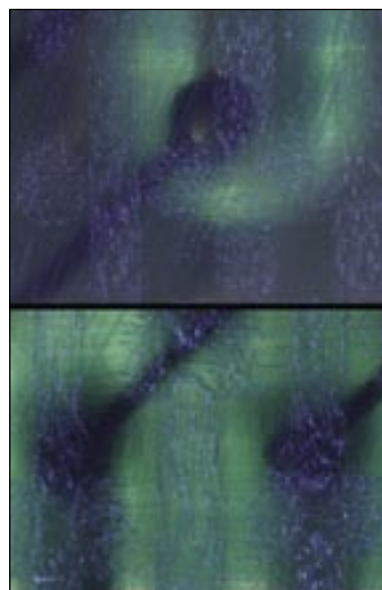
Examples of via and track patterns visible through the PCB during grinding
